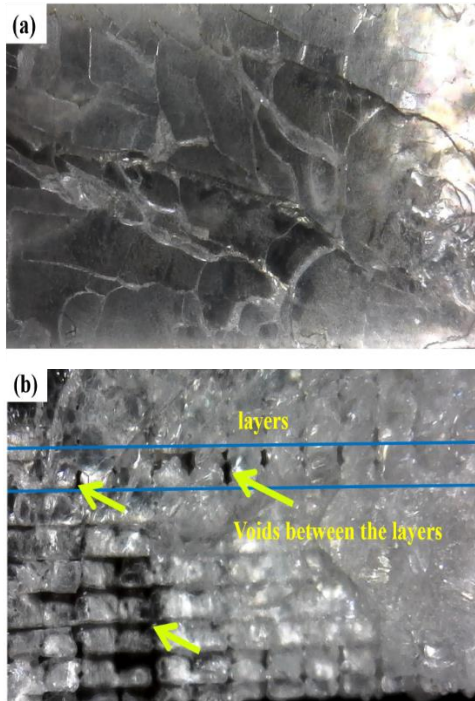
Digital micrographs of the fracture surface of tensile specimens: (a) compression molded; and (b) 3D printed specimen.
